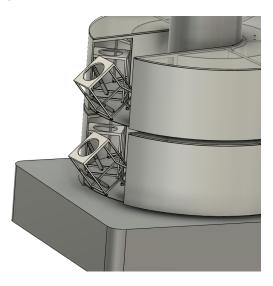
Tool access position demonstration, showcasing the clearance from top level ring.
